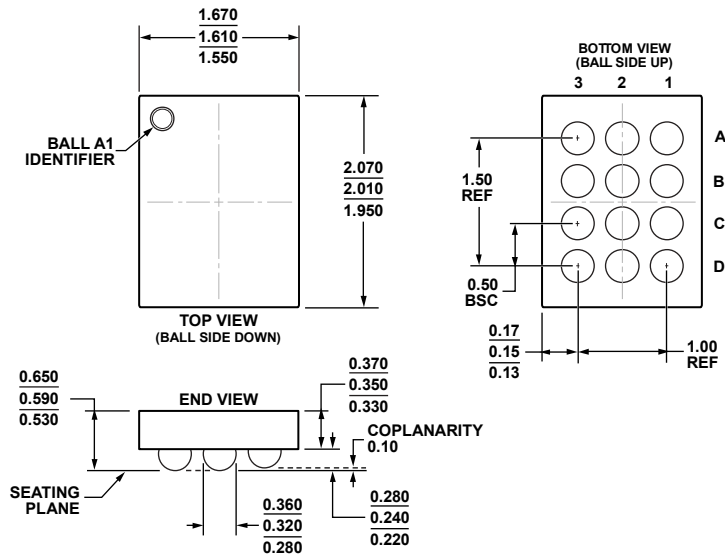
12-Ball Wafer Level Chip Scale Package [WLCSP] (CB-12-1)
